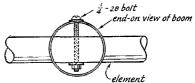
The center element section is held in the boom with a 14-28 machine screw, nut and lock washer. The guy wire attaches to the head of the bolt.
